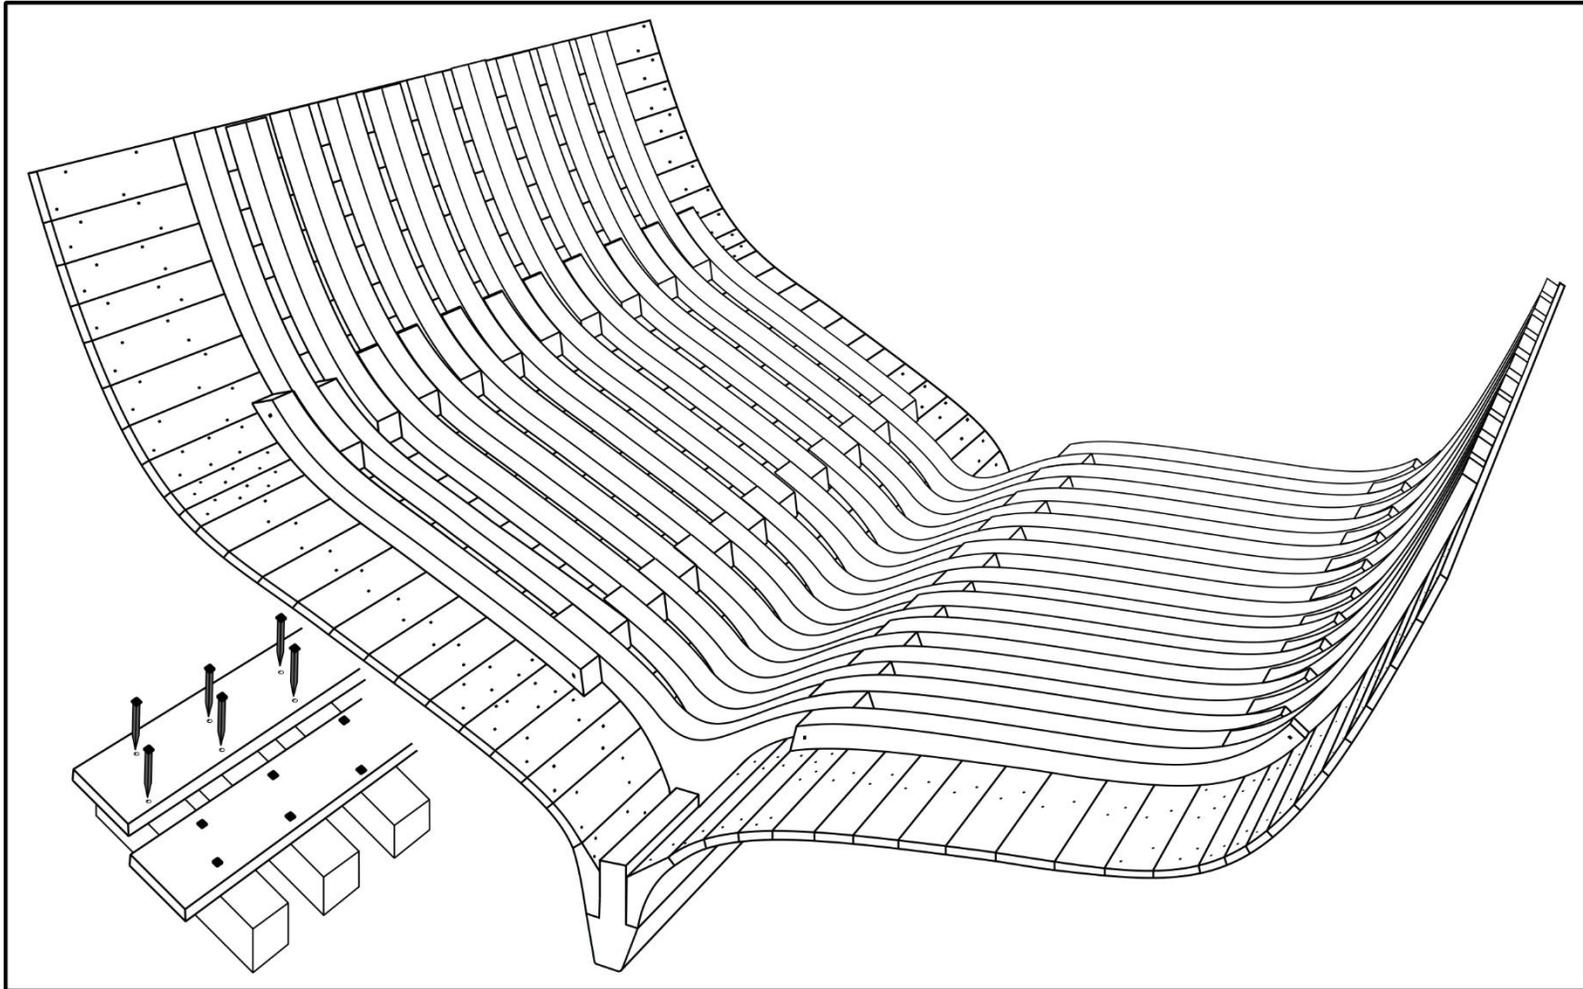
Shell-built carvel construction with the planking first assembled using pegged mortise and tenons (as shown in the bottom left). (Author's drawing)
